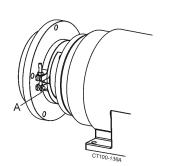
Clamp Impeller/Backplate to Motor Adapter
